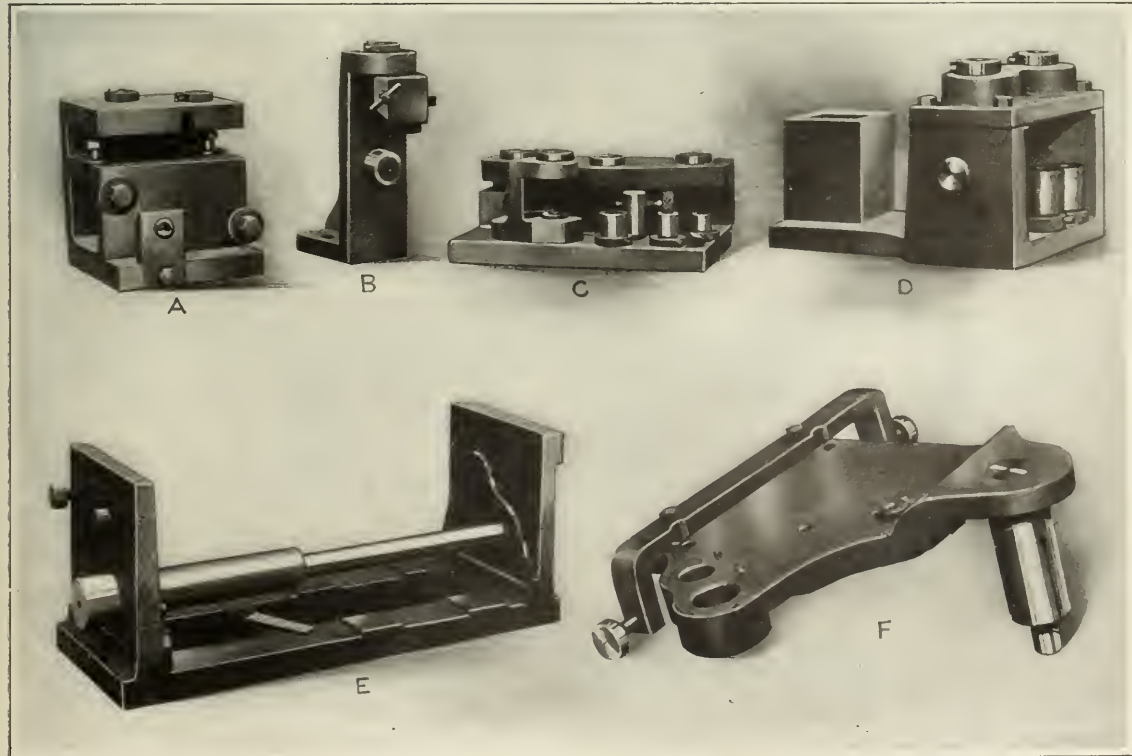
A, Drill Jig for Index Segment Bracket; B, Drill and Facing Jig for Ends of Cross-slide Spider; C, Drill Jig for Index Levers; D, Drill Jig for Index Segment Bracket; E, Drill Jig for Cam-shaft Gear-box; F, Drill Jig for Cam-shaft Gear-box Bolt Holes
